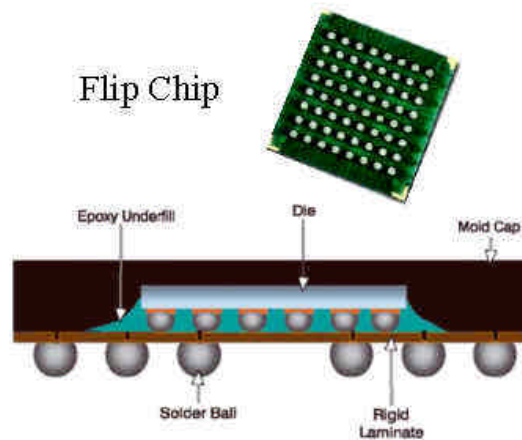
Illustration of a Flip Chip device and an assembly cross section.
